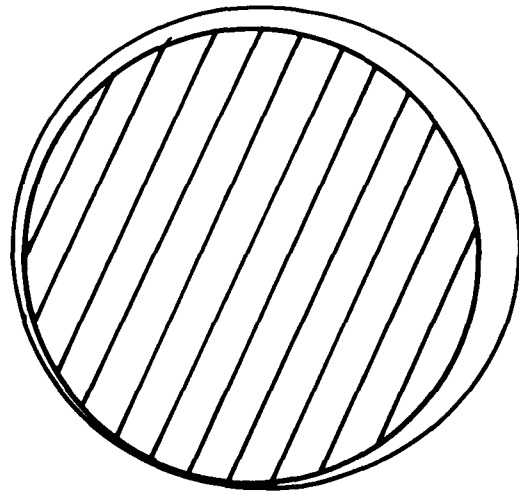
Initial and Post-Coldwork Hole Edge Boundries for Fastener Holes #1 and #2 (Specimen #7).
